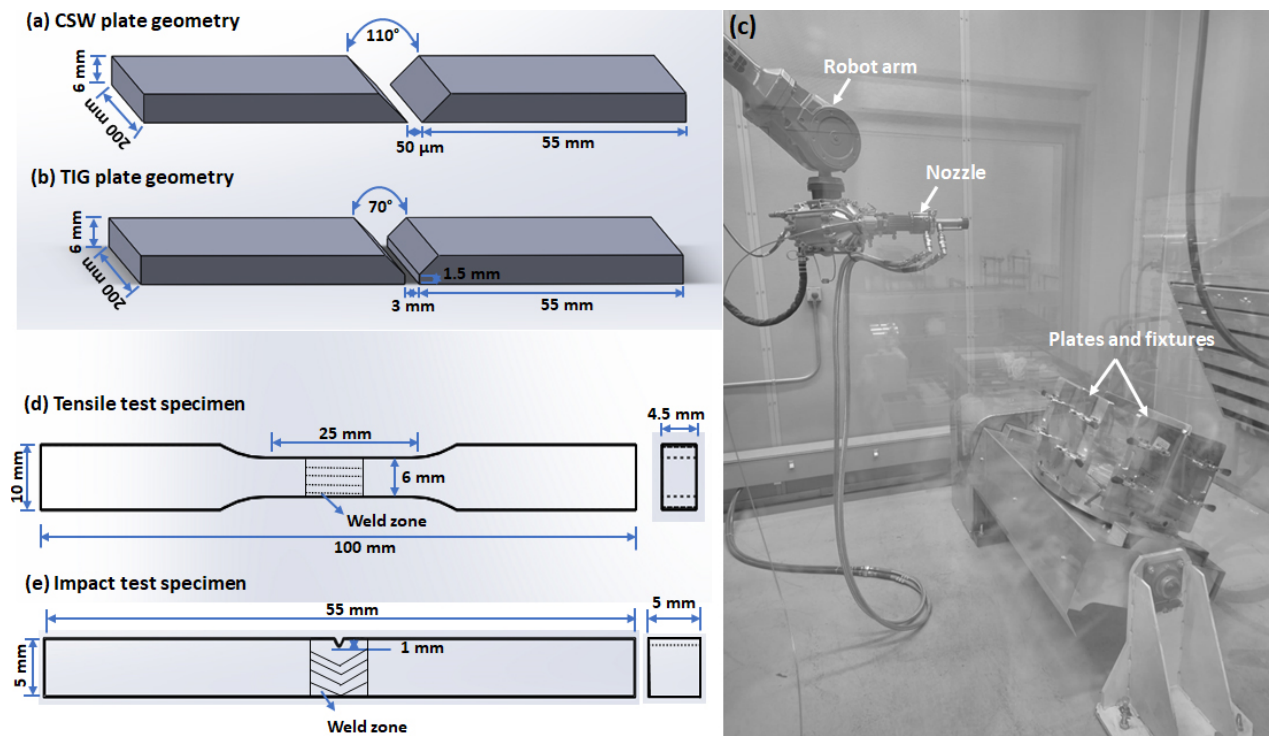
Geometry of AA 6061-T651 plates for (a) CSW, (b) TIG welding; (c) the high-pressure cold spray system and plates in fixtures, ready for CSW; and specimen geometry for (d) tensile and (e) impact tests. (b), (d), and (e) are adapted from Ref. [127].
